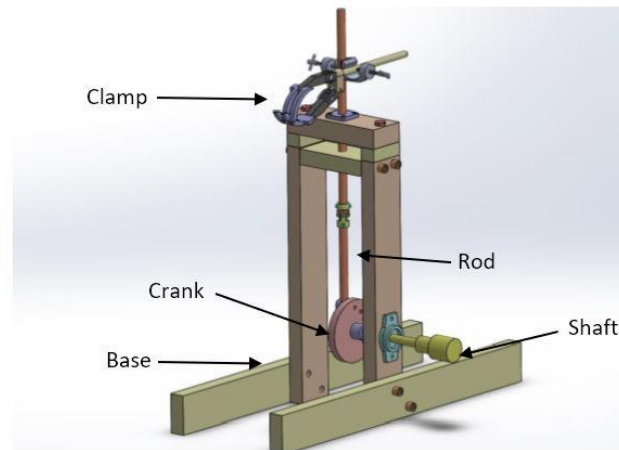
Assembled part of base, shaft, crank, rod, and clamp.
